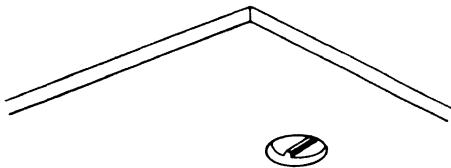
Countersink the hole from the back of the base so the flathead screwhead will be below the surface of the board.
